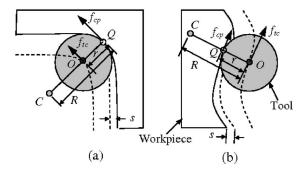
Definition of feedrate at the cutting point and feedrate at tool the center in 2.5D contour milling: (a) concave arc milling and (b) convex arc milling
